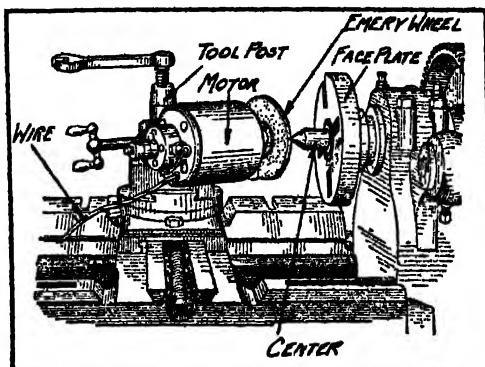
Electrically Operated Grinding Attachment for Lathe Tool Post.
